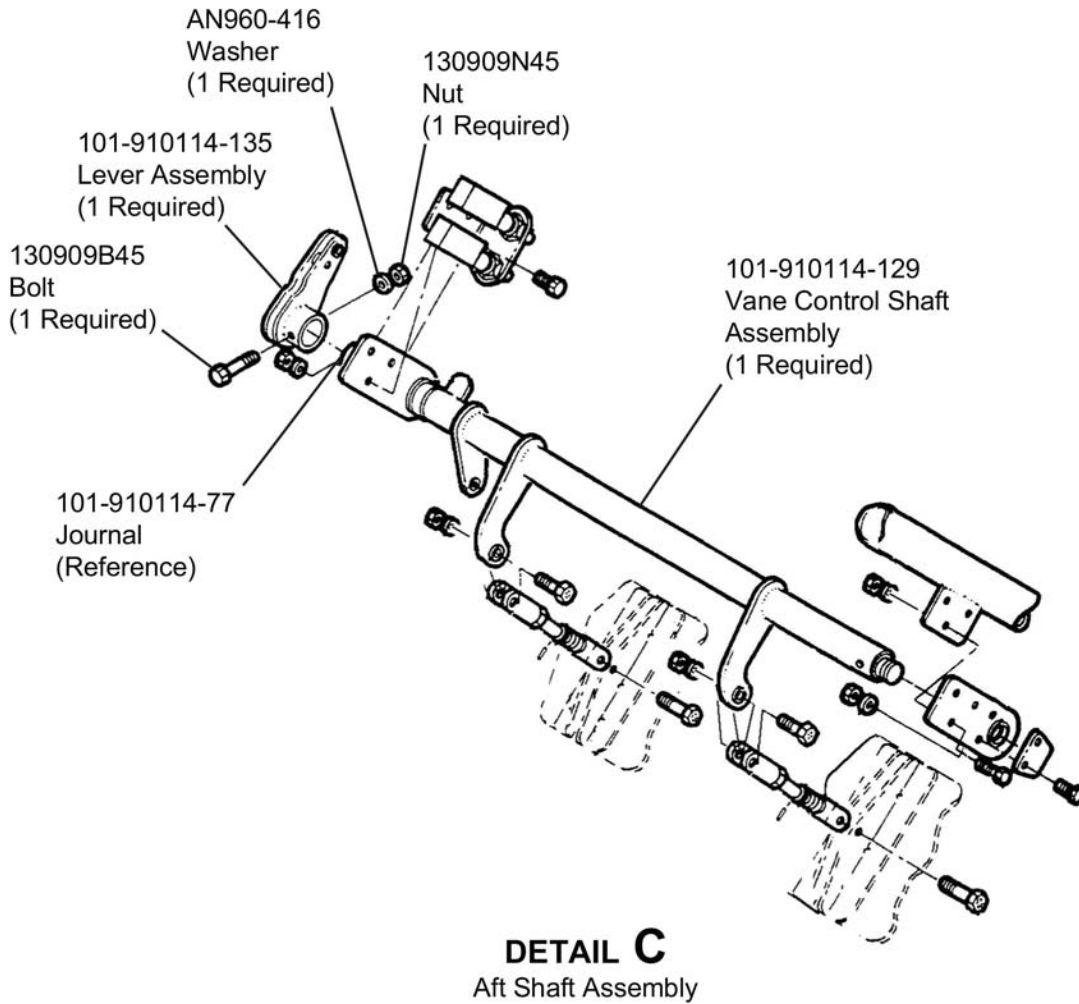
Forward and Aft Vane Assemblies (Sheet 2)
